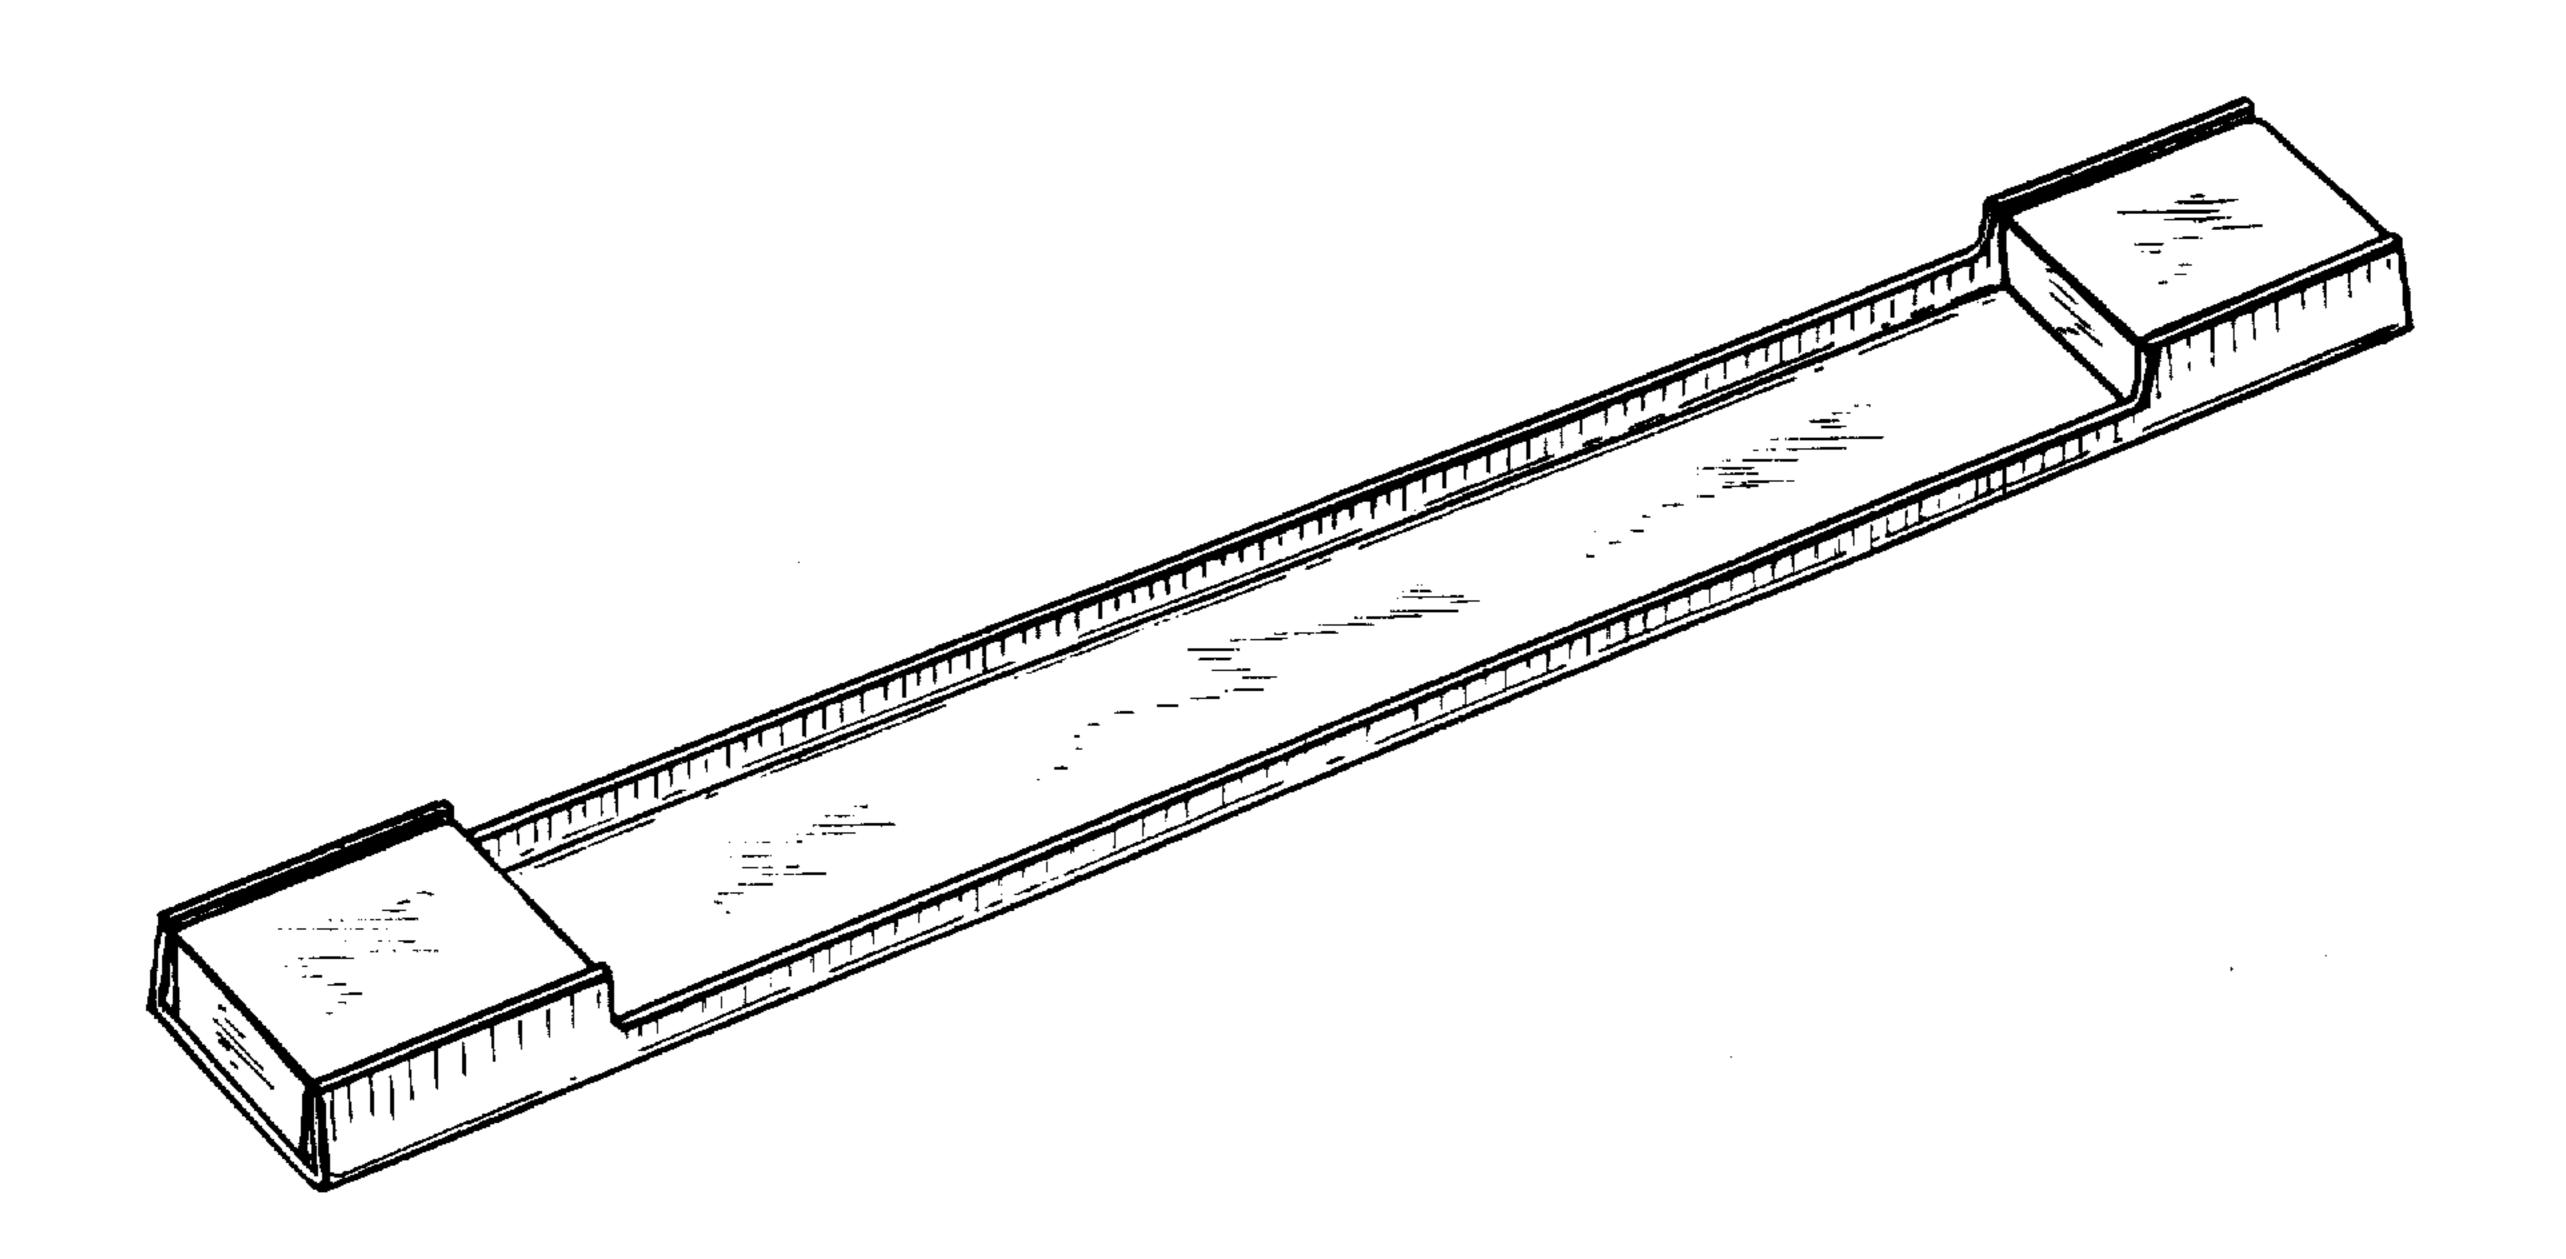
is a perspective view of a magnetic device for the temporary fixation of ceramic welding ducts to steel surfaces showing the inside thereof;
